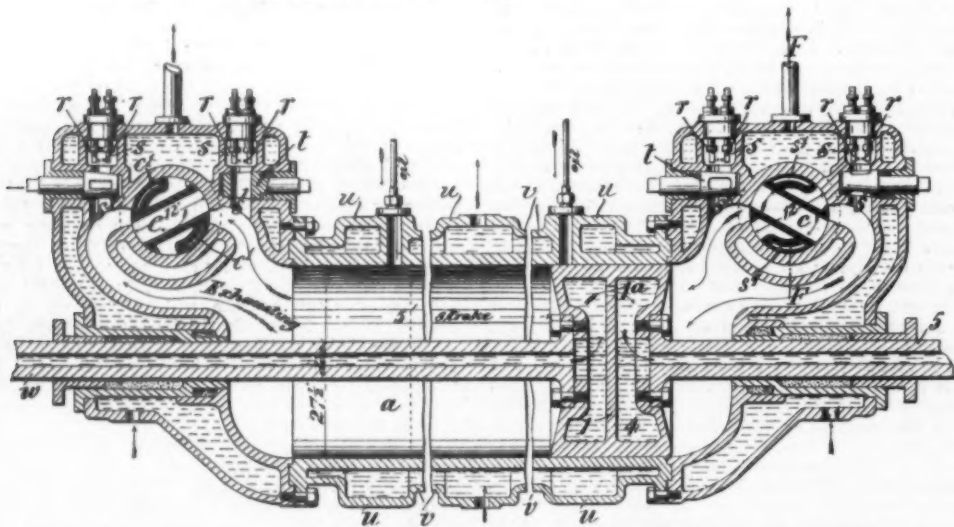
CROSS-SECTION THROUGH CYLINDER AND VALVES OF 700 HORSE-POWER DOUBLE-ACTING GAS ENGINE.
